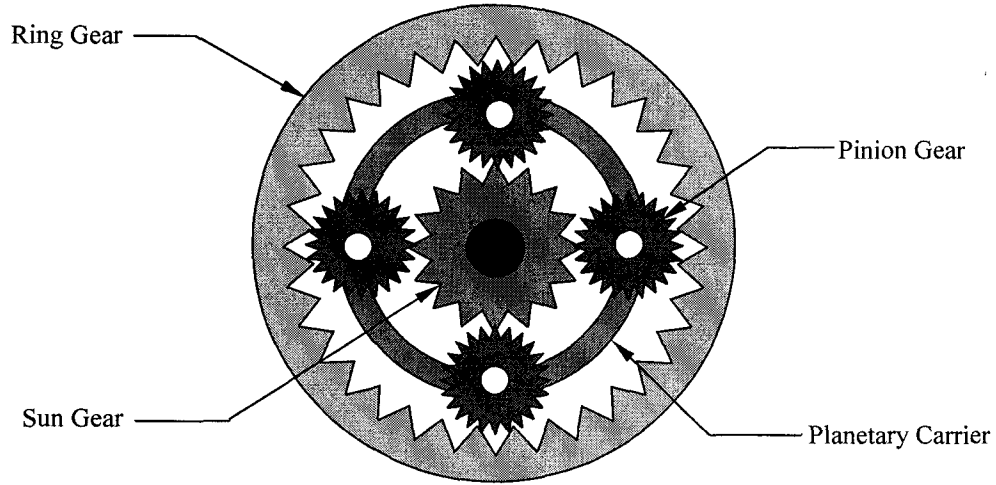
Speed coupling through use of planetary gear arrangement.
